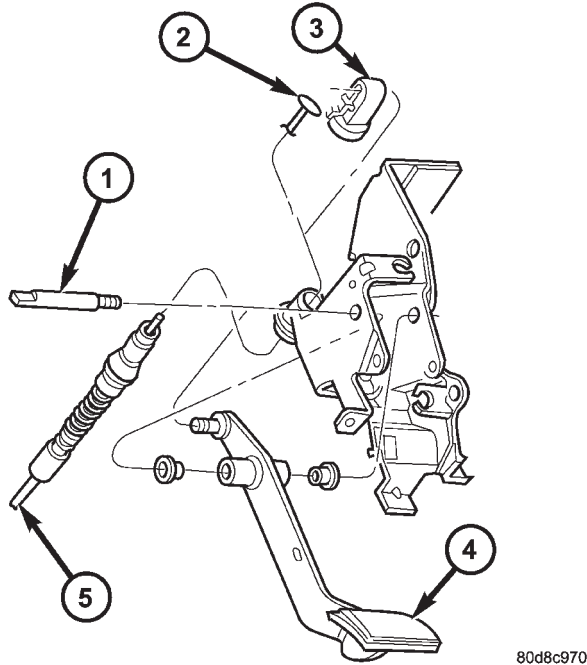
Clutch Cable at Pedal Bracket Assembly
